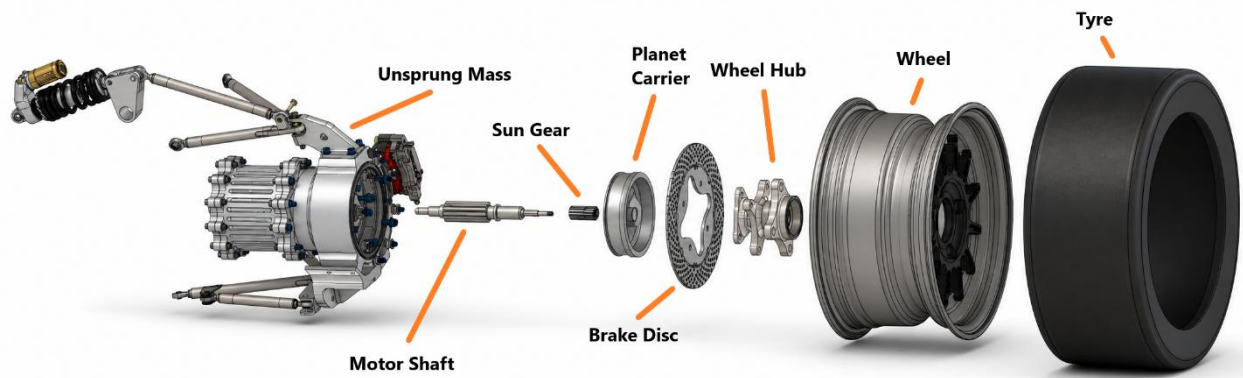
Rear corner assembly exploded view with rotating components labelled
